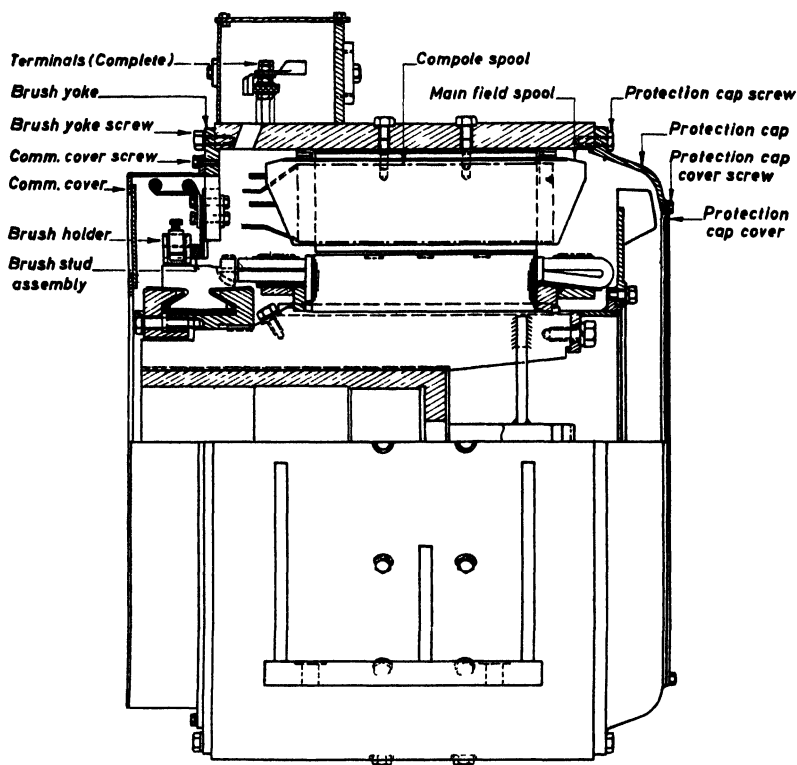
SECTIONAL VIEW OF GEARLESS LIFT MOTOR
